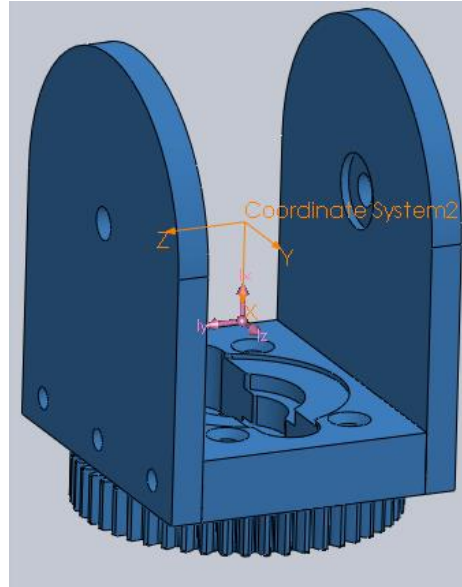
The second assembly of the shoulder was the outer shell and lower slew gear that were rigidly fixed as one unit. The rotation happened at the center of the top hole based on the internal bevel gear of the previous assembly. The location of the center of mass was in line with the axis of rotation and offset along the x axis by 20mm.
